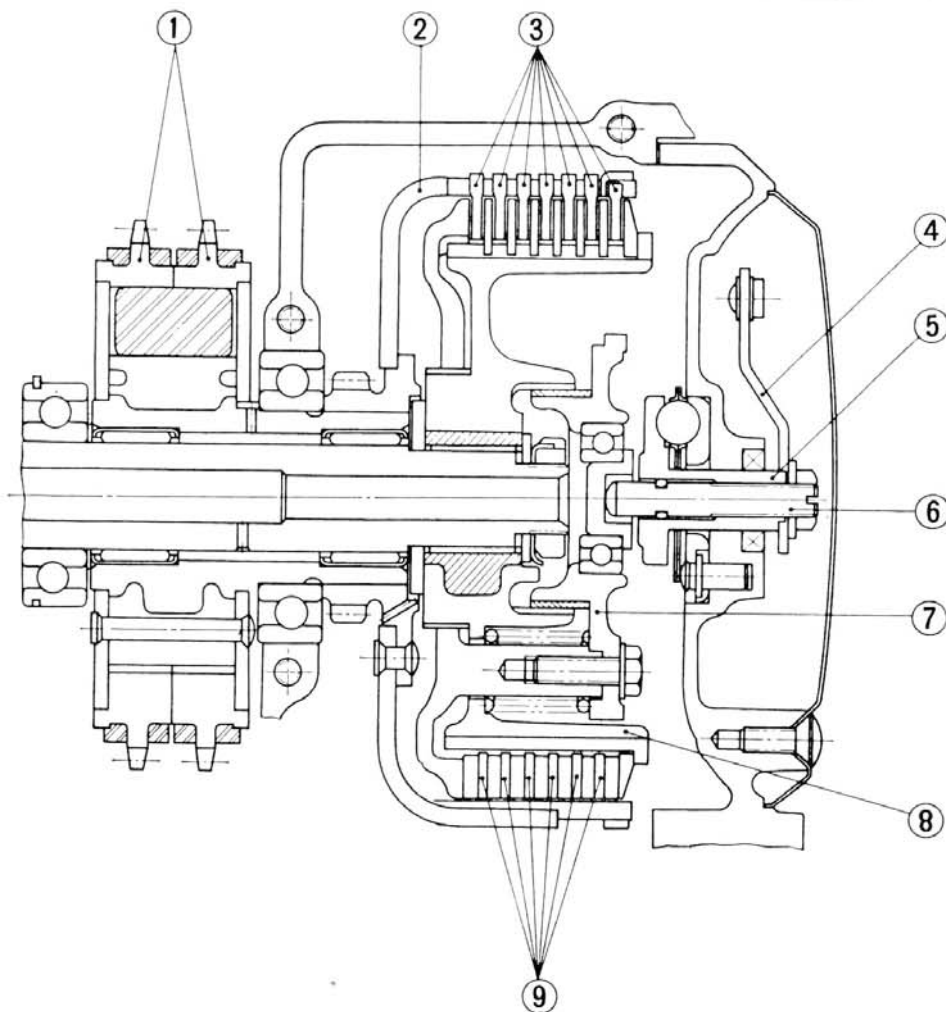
① Primary driven sprocket ④ Clutch lever ⑦ Clutch lifter plate
